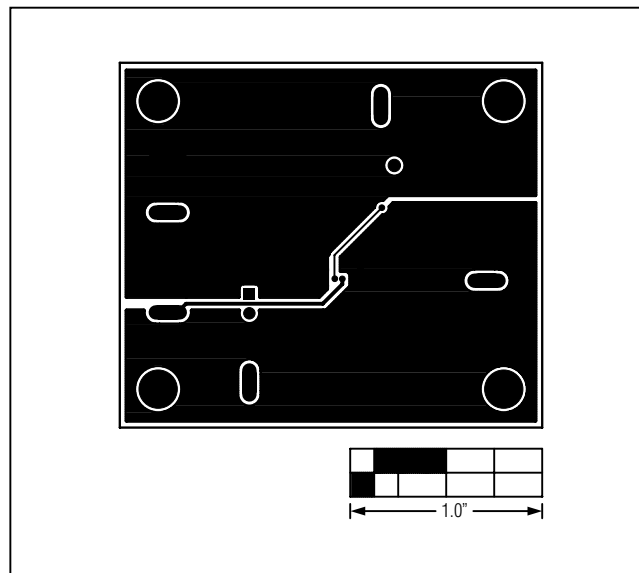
MAX17501H EV Kit PCB Layout—Solder Side
